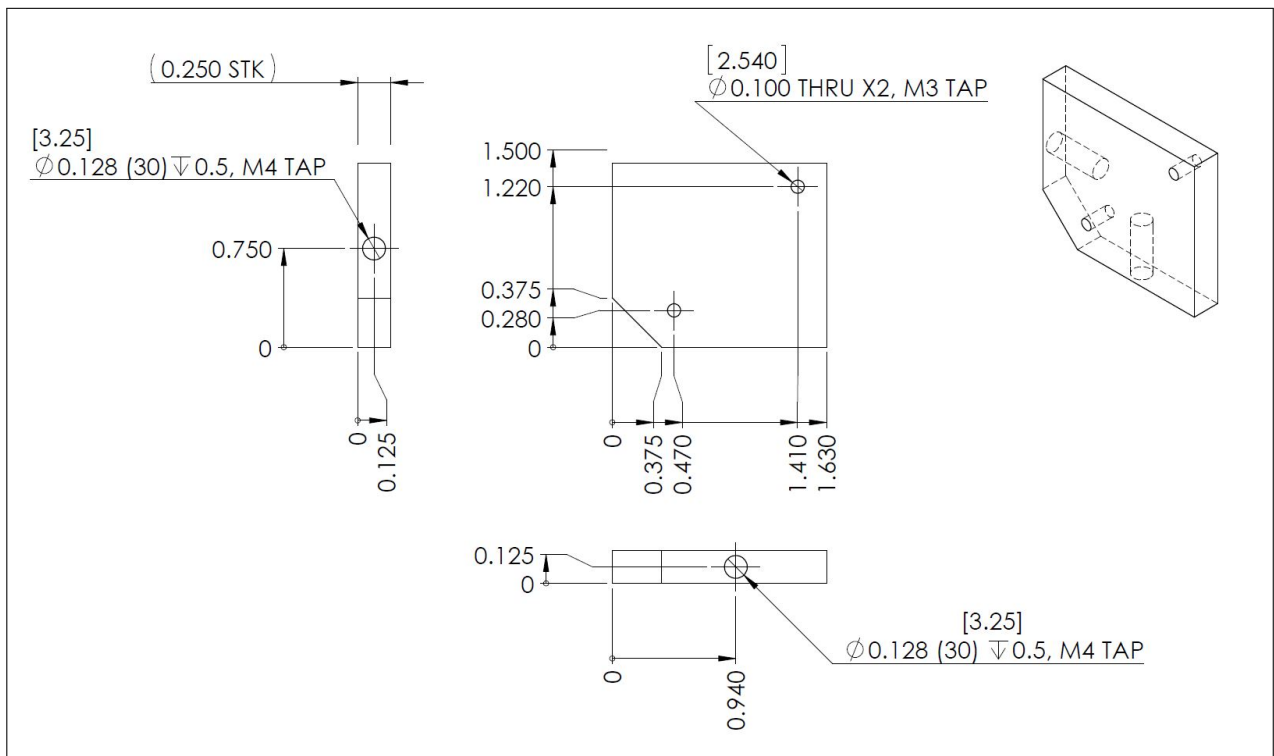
Force Input Device - Load Cell Mounting Plate Detail. Material: Aluminum.
